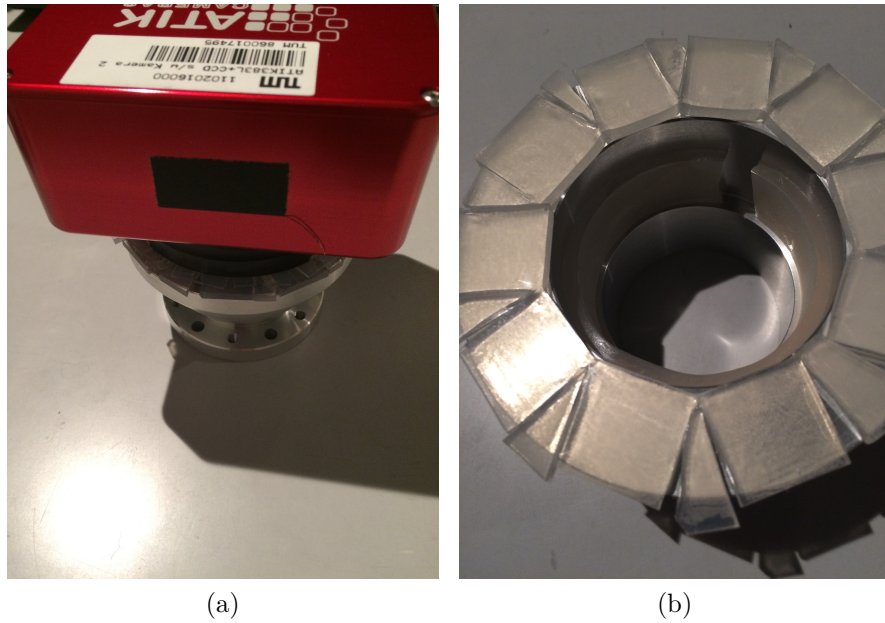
Photographs of the manufactured CCD holder. In (a) the CCD device is placed on the holder and is guided by the inner mount to a centered position. The holder can be installed easily on the flange of the stray light baffle. It has an inner mount for the detector, where silicone gel dampers are installed to eliminate direct contact, see (b). Due to the fact that the sensor is placed on top of the surface of the holder, the top surface is damped with silicon dampers as well.
